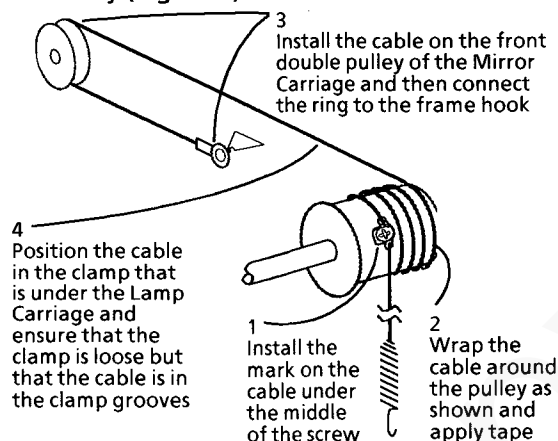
Installing the Rear Scan Cable on the Rear Drive Pulley
